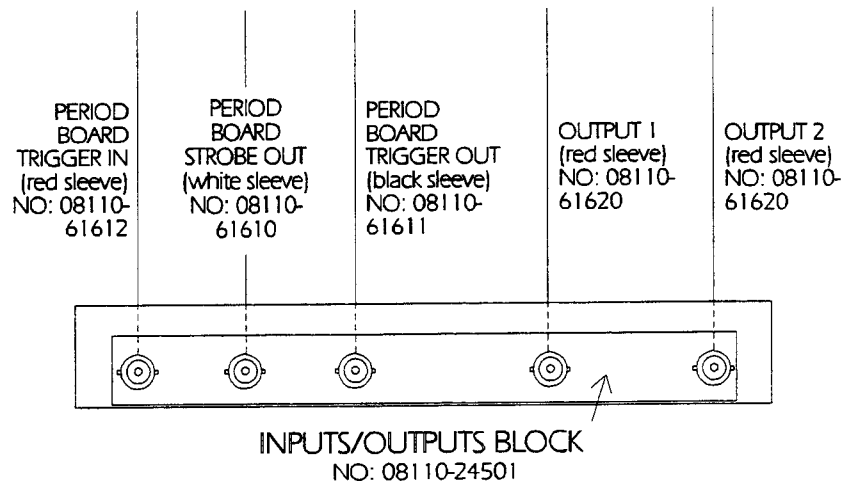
Inputs/Outputs Block Showing the Fixing Screws
